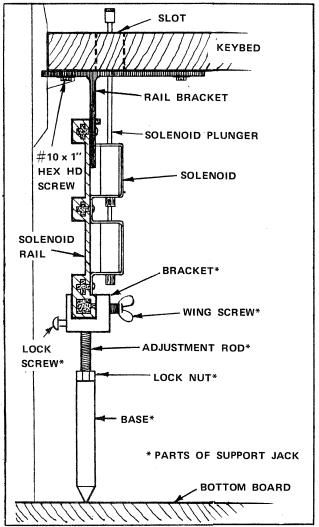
B Cross-section view of the Solenoid Rail aligned behind the Rail Brackets in a Direct Blow Action piano.
